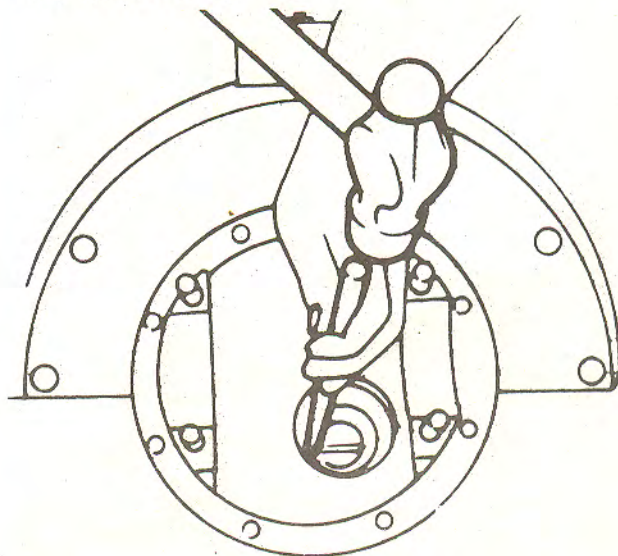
Outer bearing races can be driven out of their seats in the differential carrier as shown.
